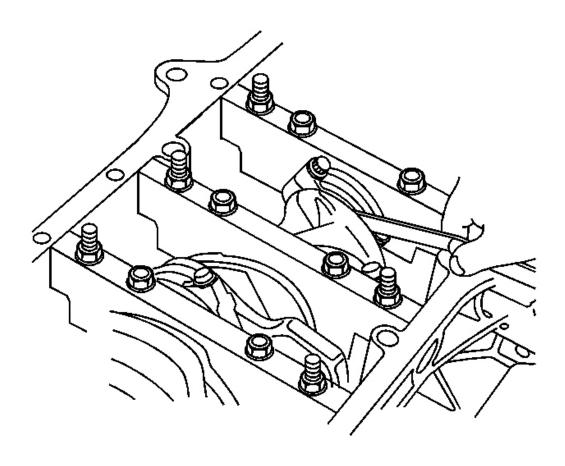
Measuring Connecting Rod Side Clearance Courtesy of GENERAL MOTORS CORP.
